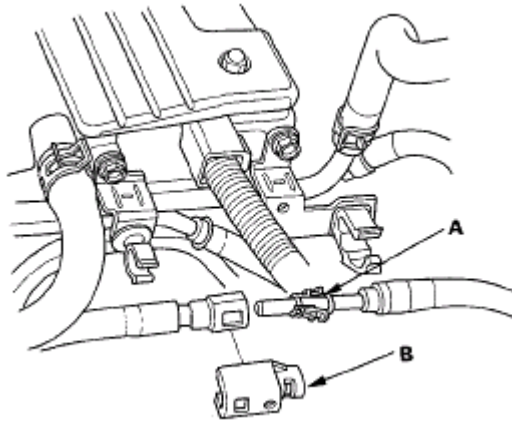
Identifying Fuel Feed Hose And Quick-Connect Fitting Cover
